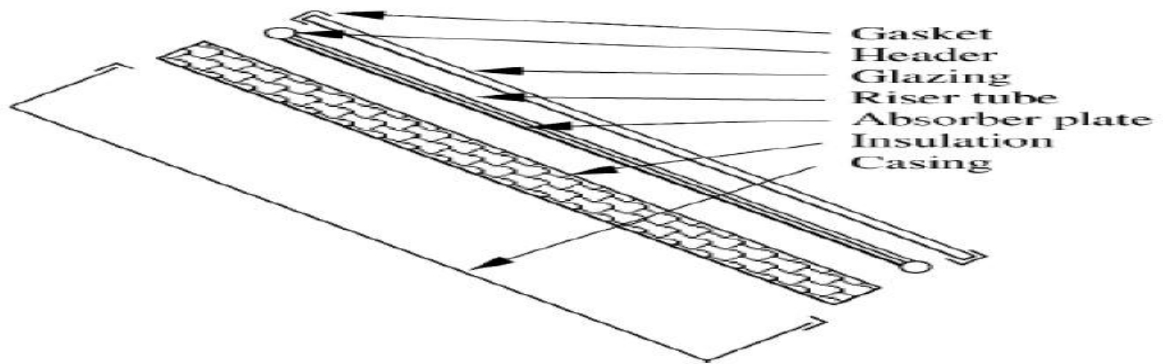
(b) Exploded view of a conventional flat-plate solar collector
